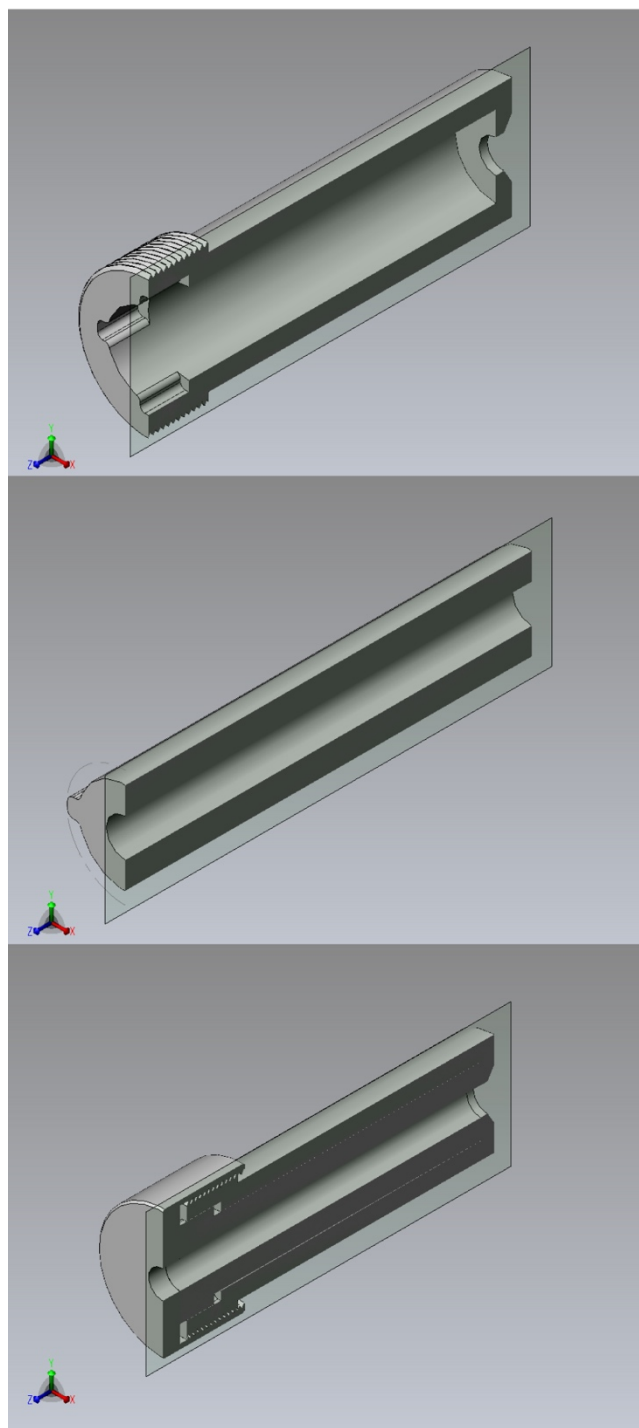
3D views of cross-sections of the outer electrode body piece (top), inner electrode body piece (center), and the whole assembly with the screw cap (bottom).
